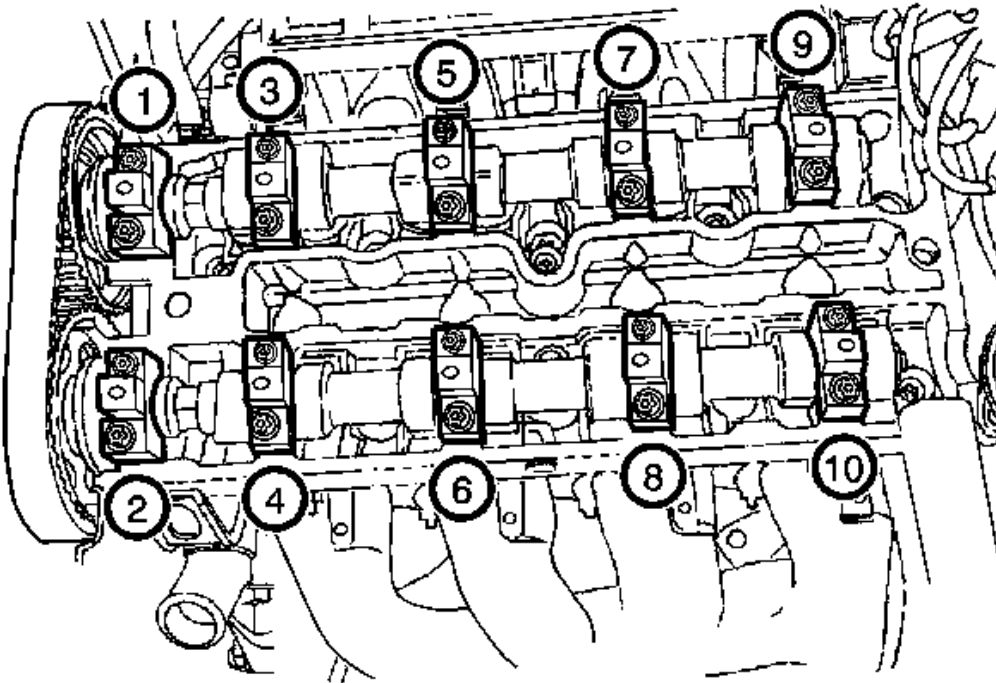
Identifying Camshaft Bearing Cap Bolt Installation Sequence
